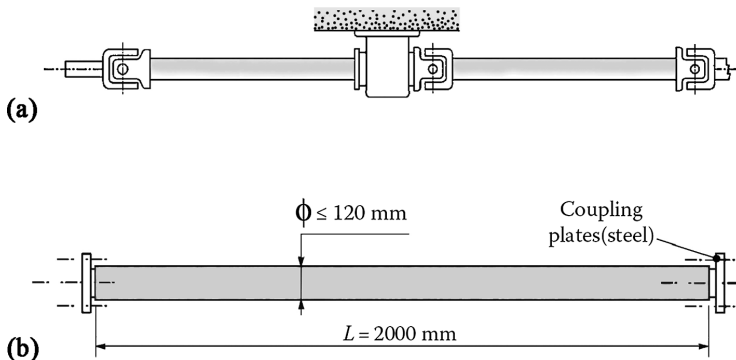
(a) Classical shaft and (b) carbon/epoxy shaft.
